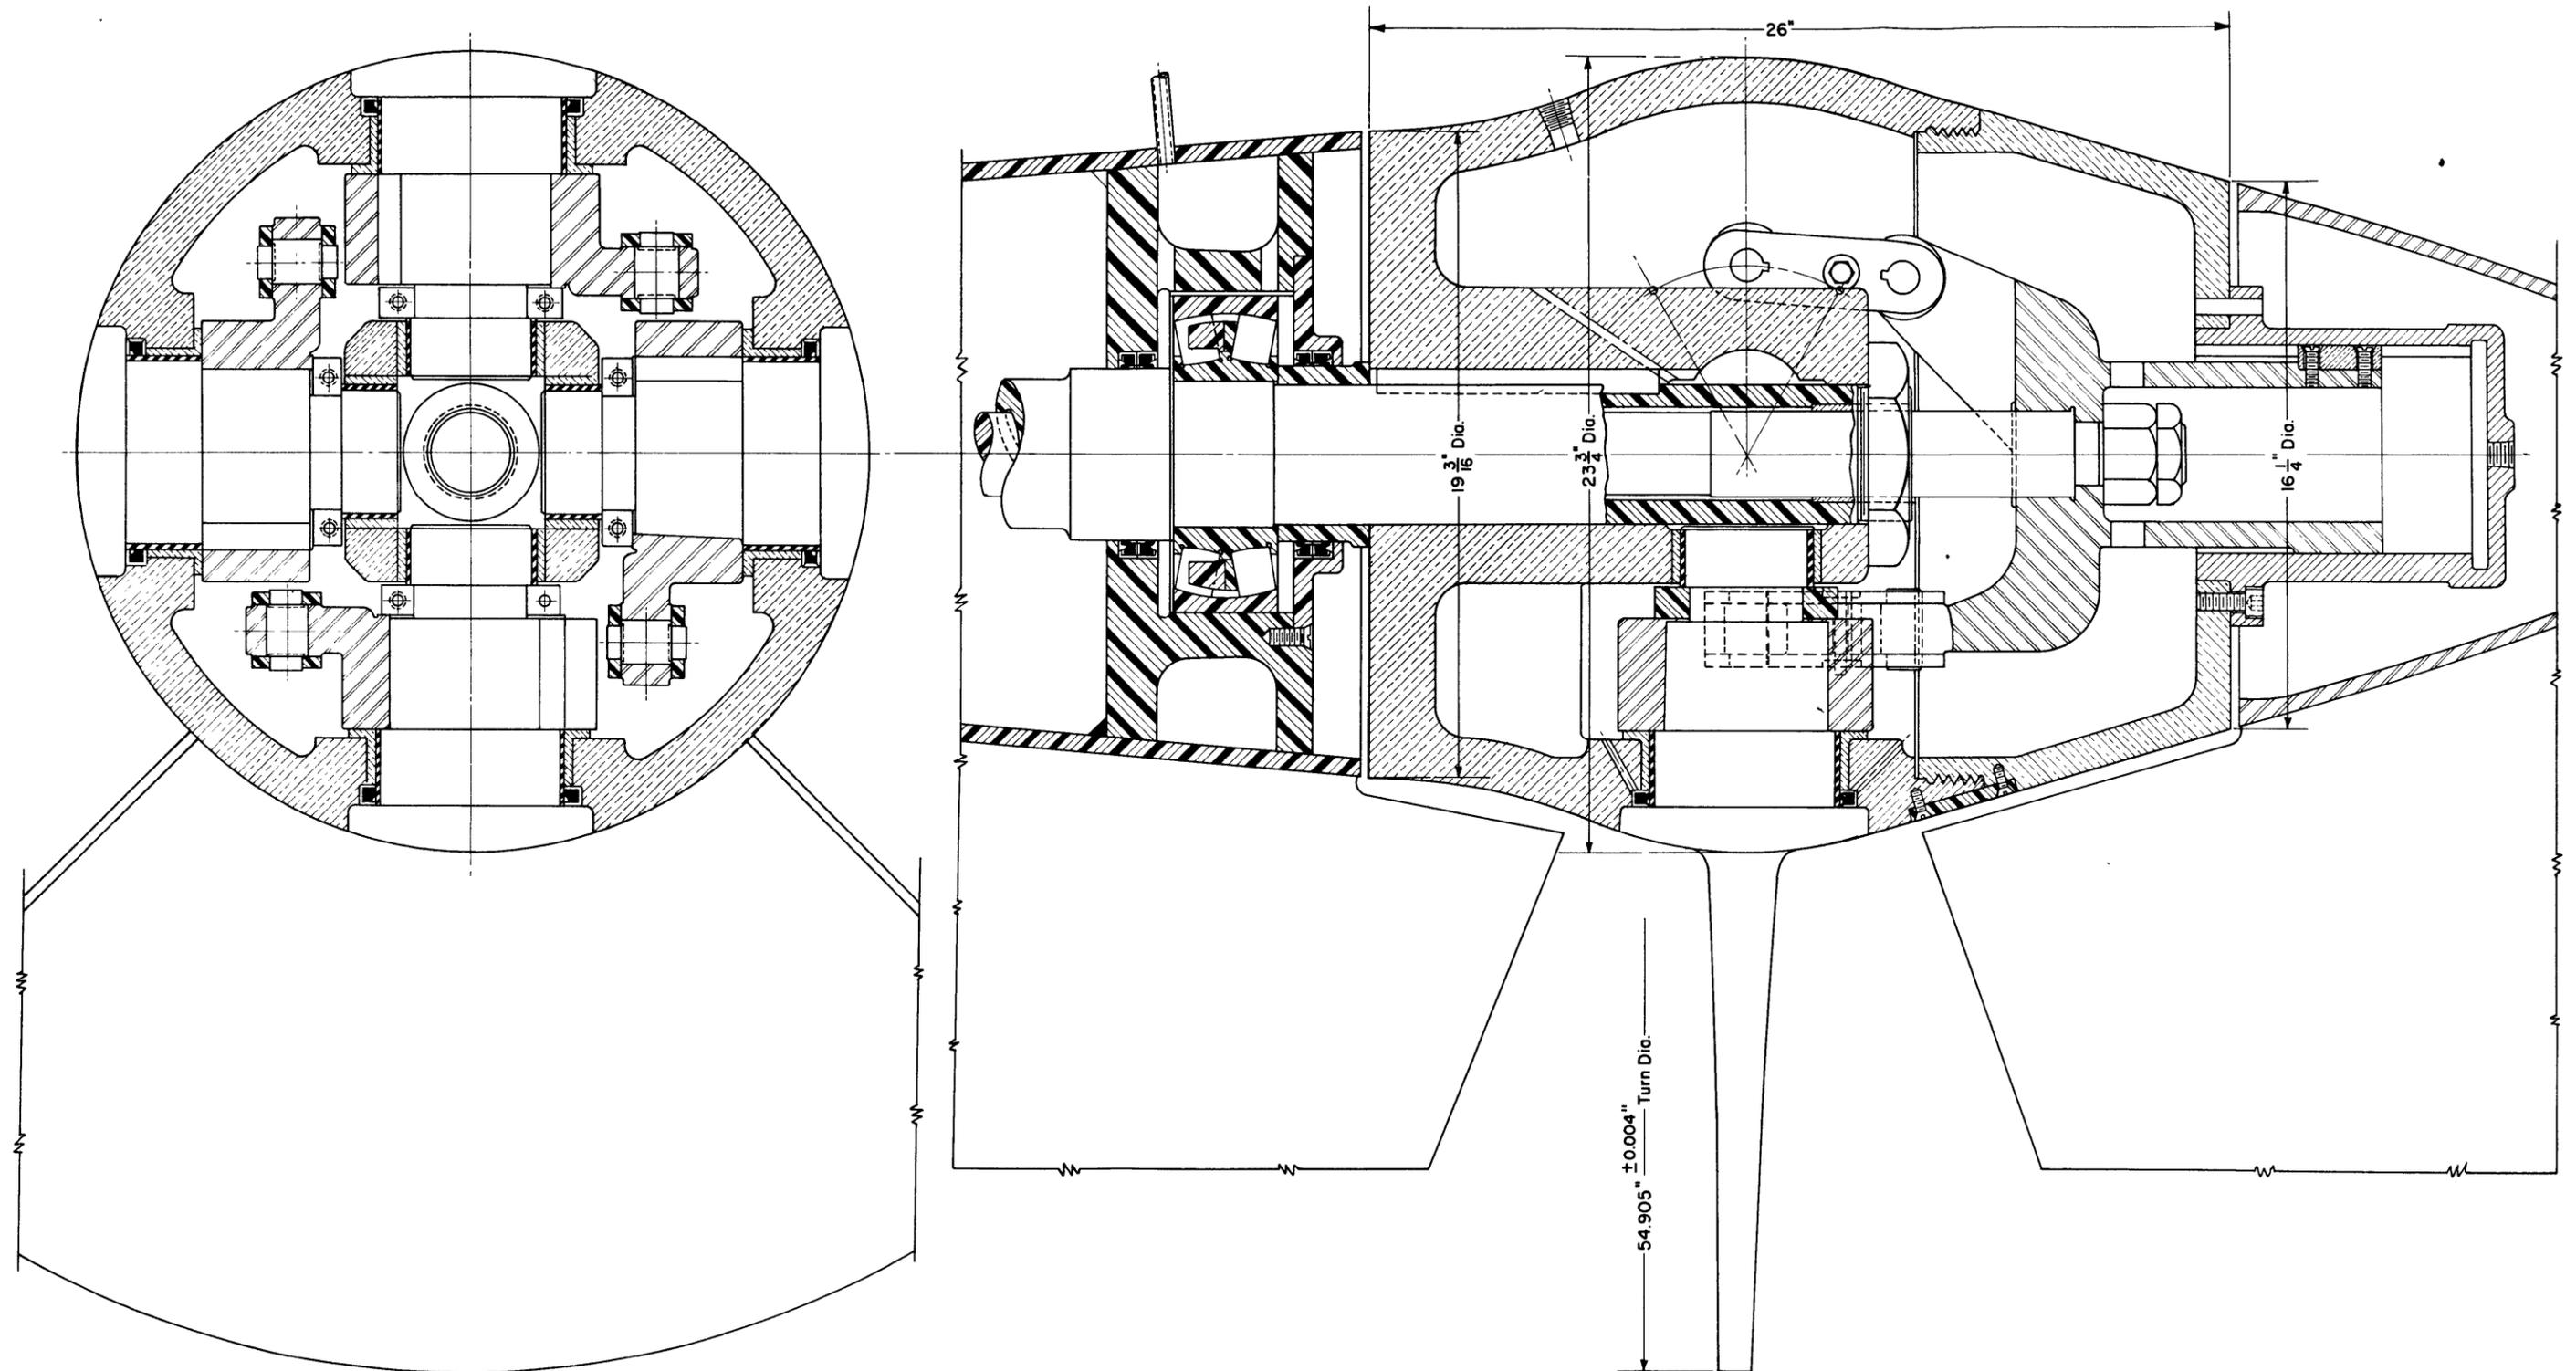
Arrangement of Hub Mechanism and Lower Bearing
